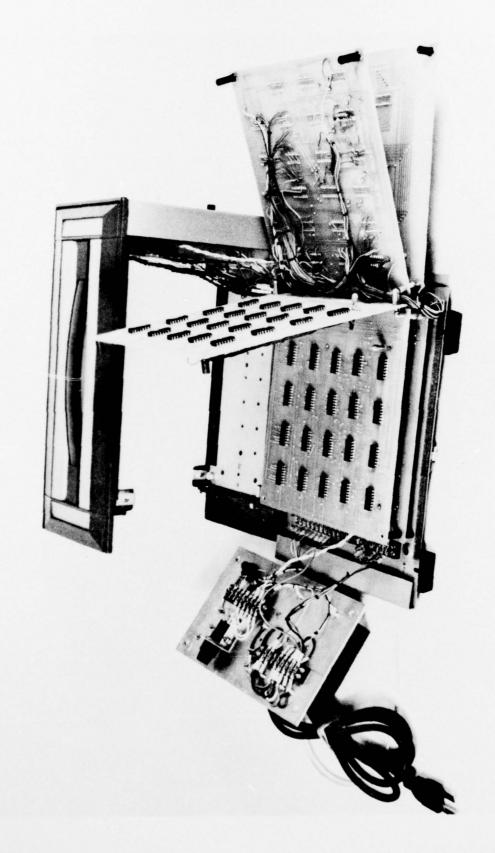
SSRD ASSEMBLY, VIEW 3
